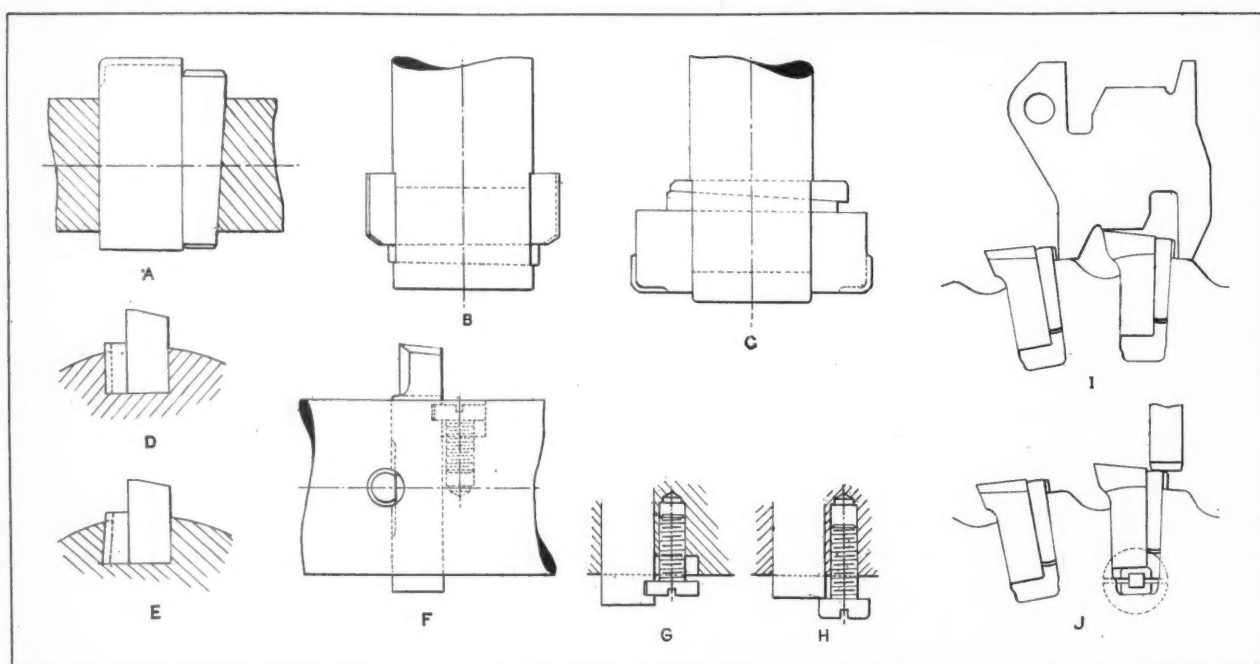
Methods of Using Wedges and Screws to Hold and Adjust Cutters
